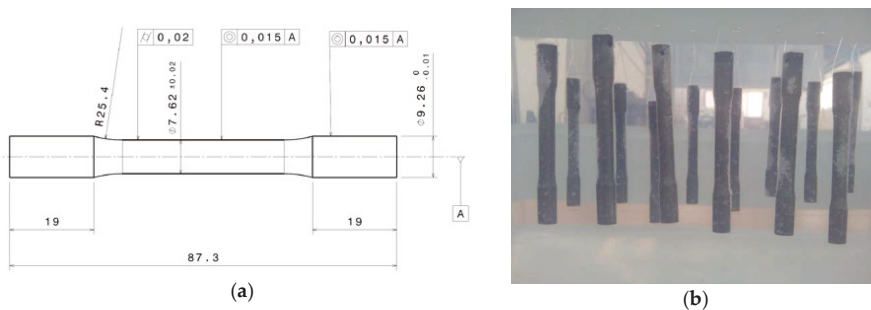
(a) Specimen dimensions according to standard UNE-EN ISO 6892-1:2016. (b) Set II samples during a corrosion test by immersion.
